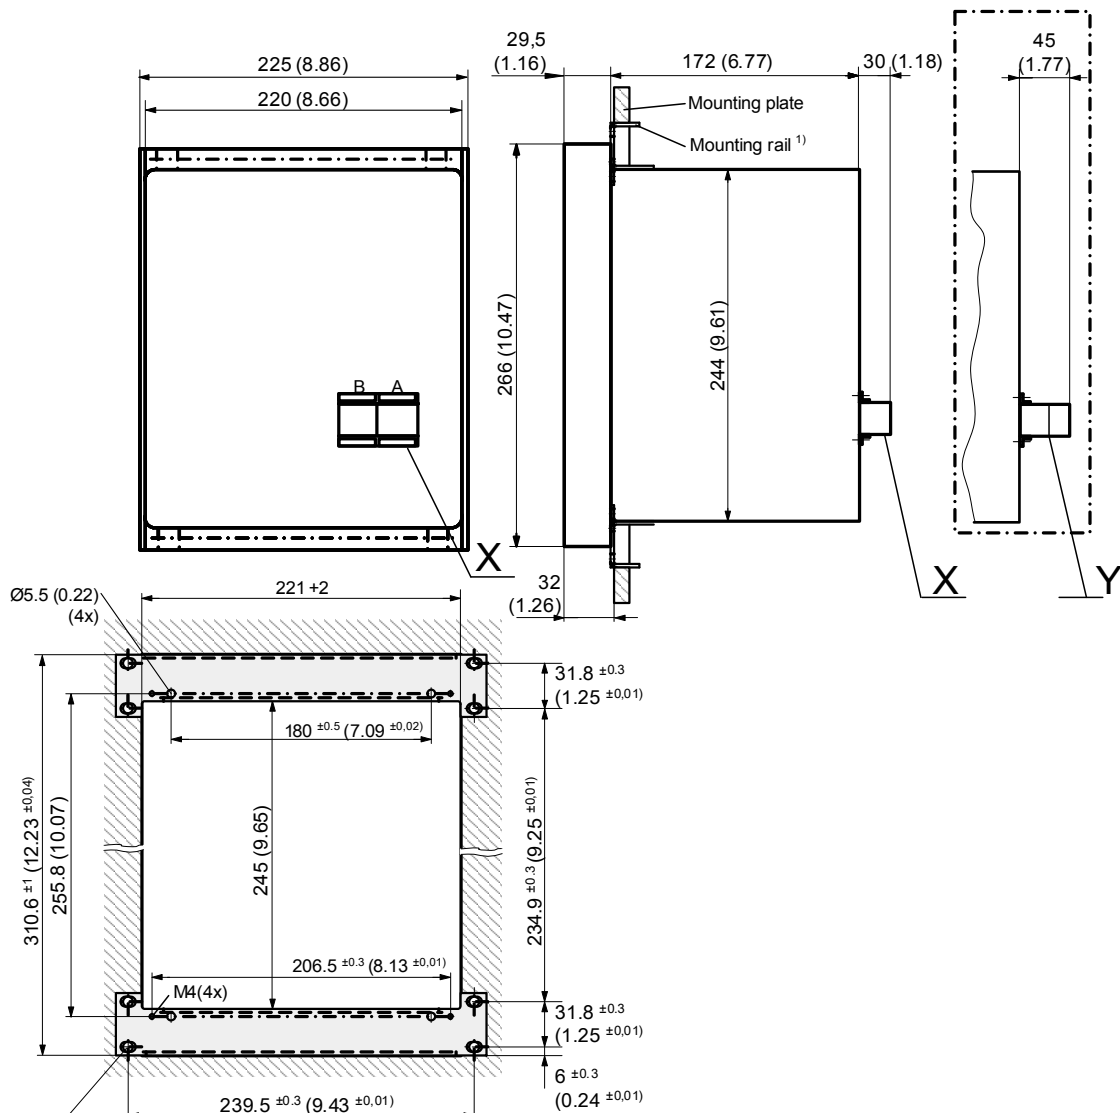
7XT34 Housing for Panel Surface Mounting 7XP2040-1
